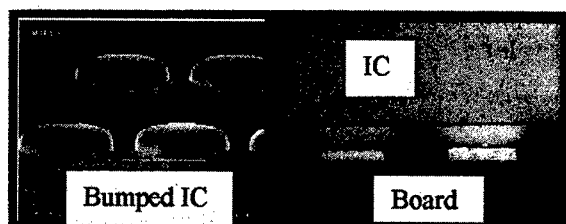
Micrograph of bumped IC and cross-section of flip-chip assembly to circuit board.
